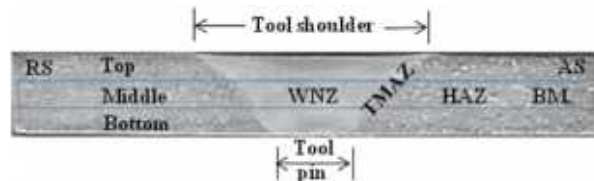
Macrograph showing the schematic of obtaining tensile specimen from different region of FSW joint
